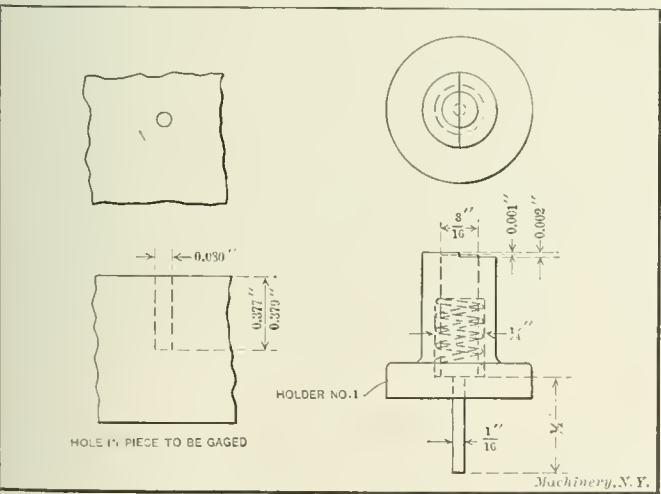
Flush-pin Gage for Gaging Small and Deep Holes
